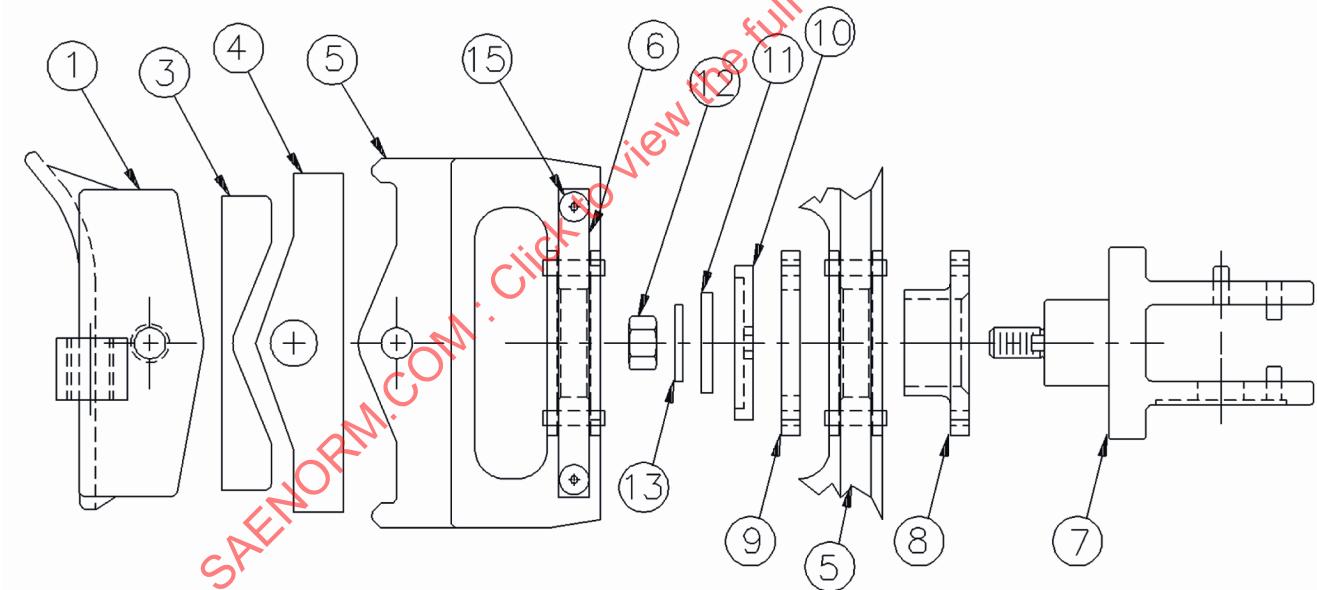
EXPLODED TOP VIEW OF THE SHOULDER ASSEMBLY
